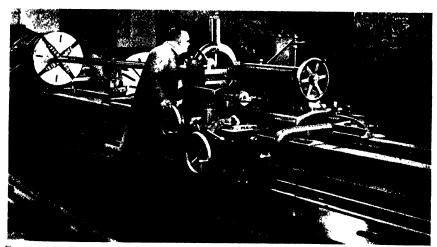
Turning a hollow stainless-steel shaft, $2\frac{3}{4}$ in. diameter \times 12 ft. 6 in. long on a Lang 36-in. swing sliding, surfacing, and screw-cutting lathe with 18-ft. bed
